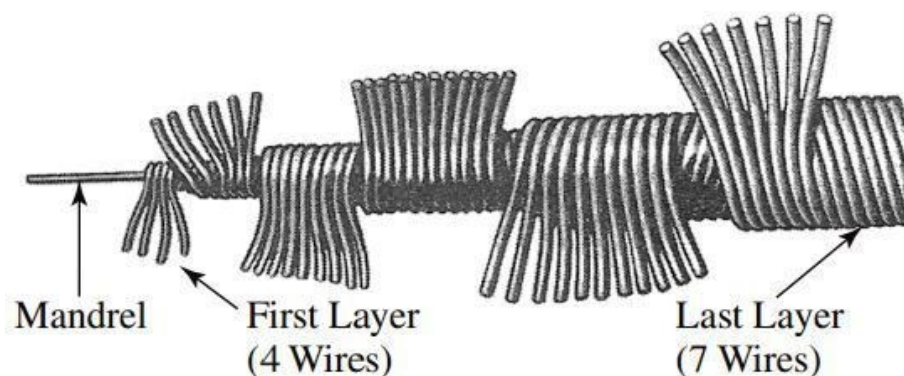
Construction details of the flexible shaft, several layers of wires are twisted around the central core. (Image source: Shigley (85))
